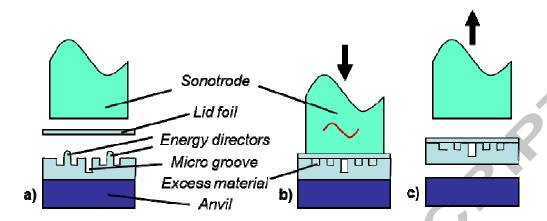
Ultrasonic welding of a cover layer onto an ultrasonically hot embossed micro groove.
